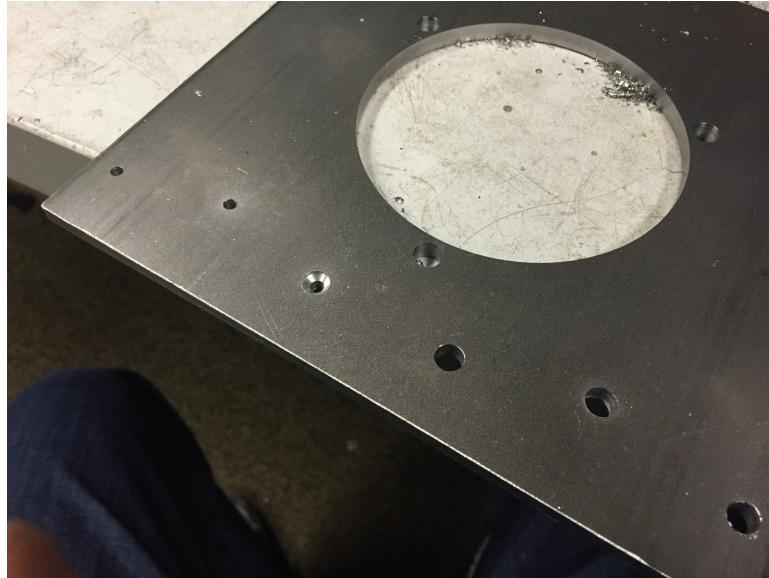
Drilling the hinge hole pattern in the correctly cut steel plate.
